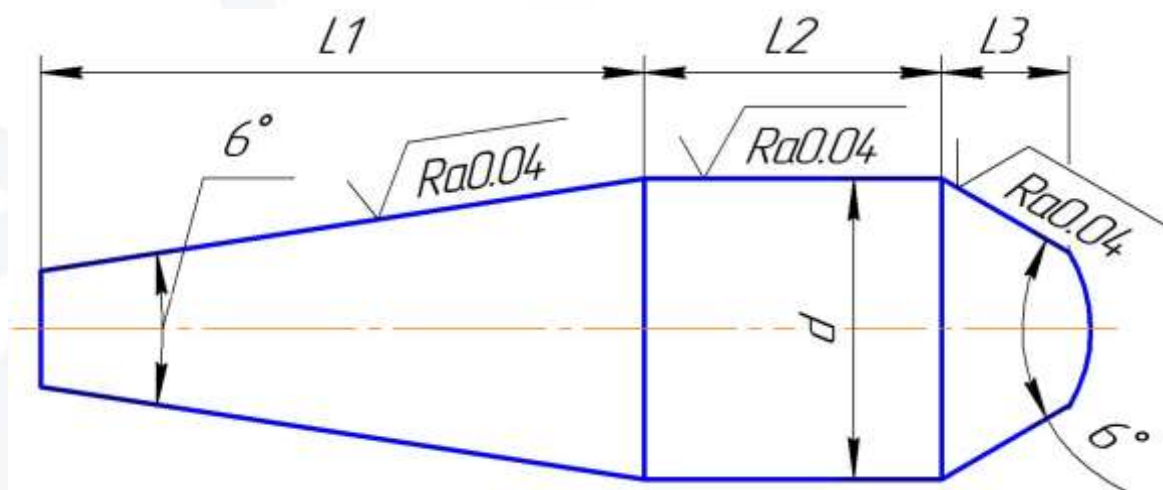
Carbide Mandrel for Deep Hole Machining small diameter
